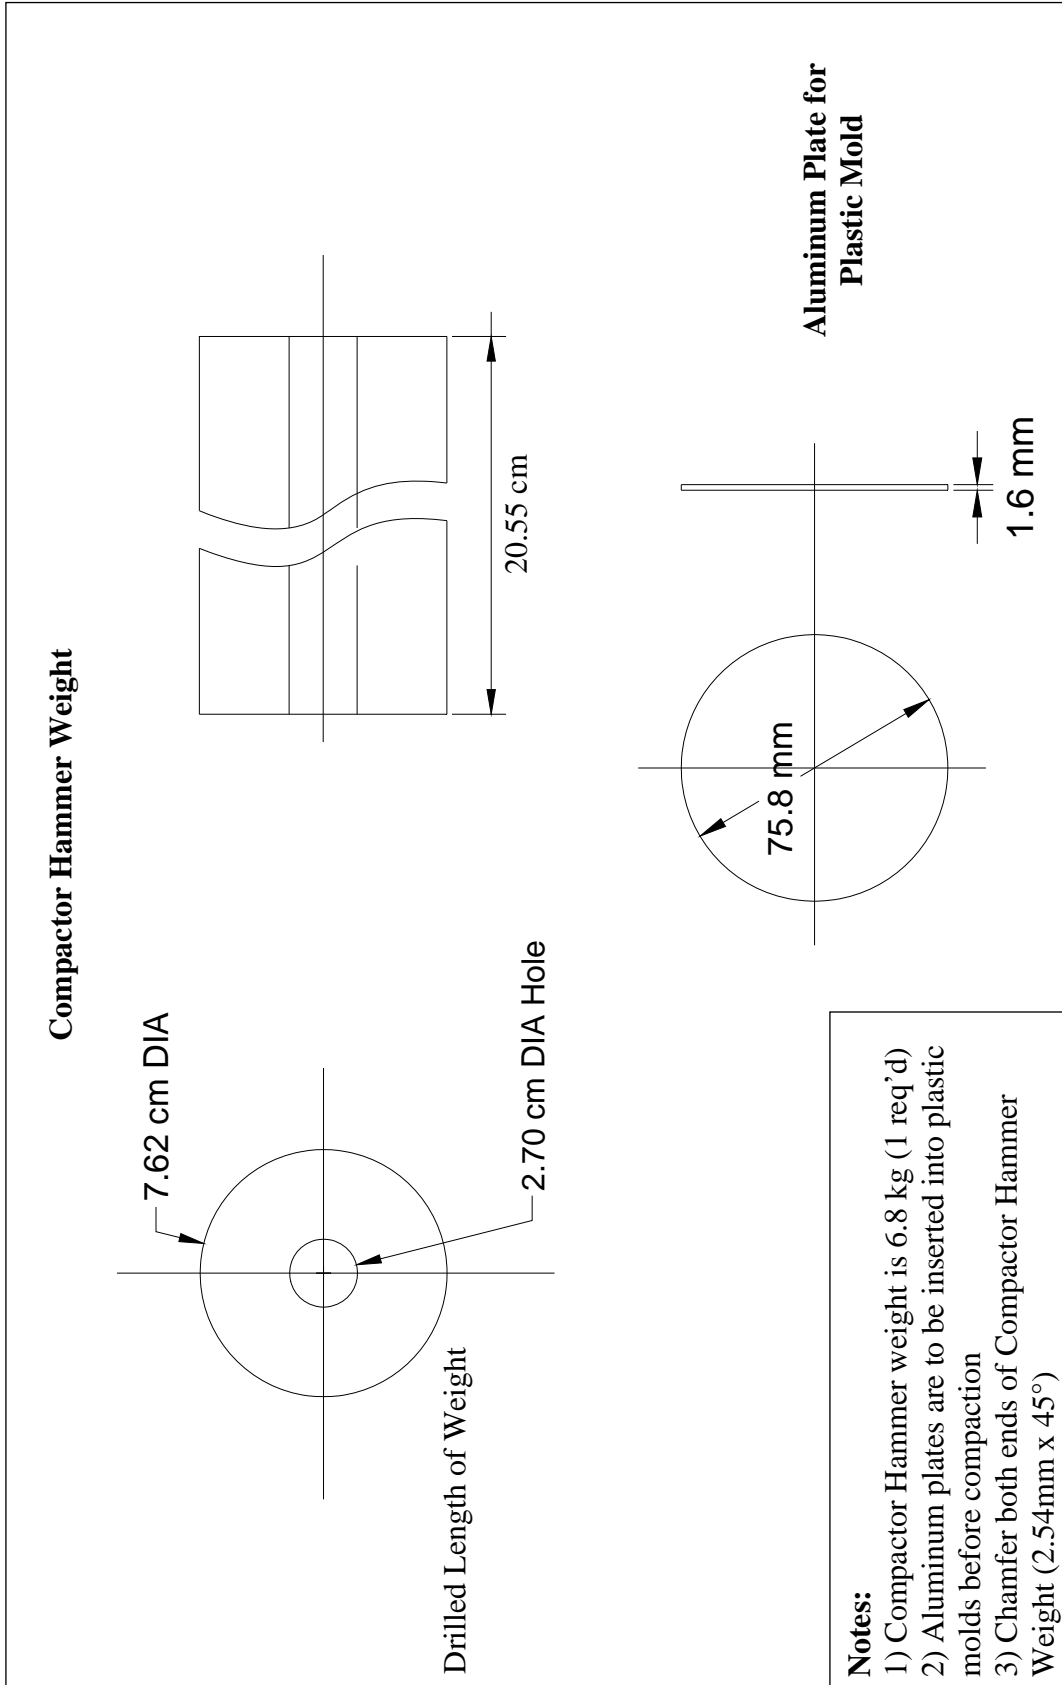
CF Compactor Hammer Weight and Aluminum Plates
